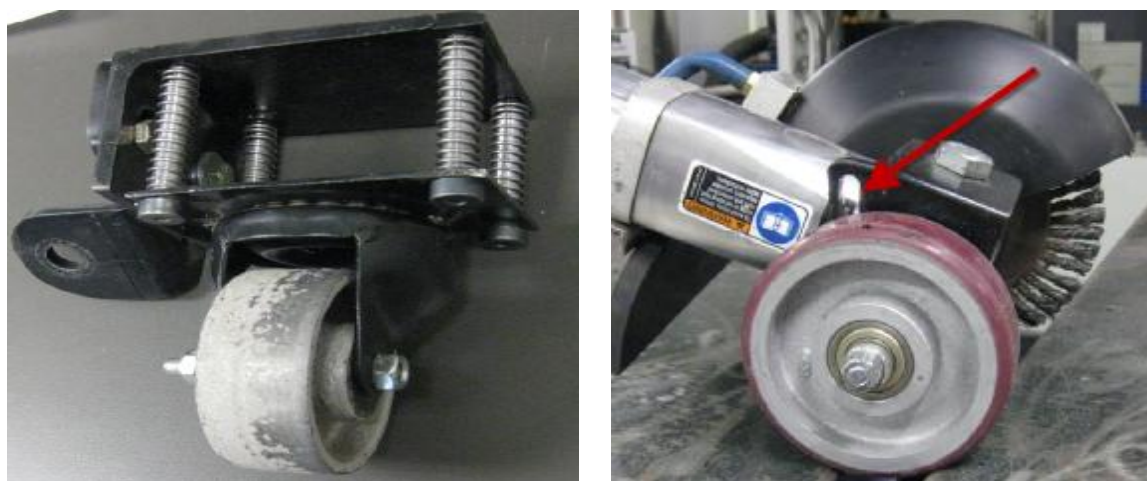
Spring mechanism with a stationary caster (left) and height adjustable assembly (right).
